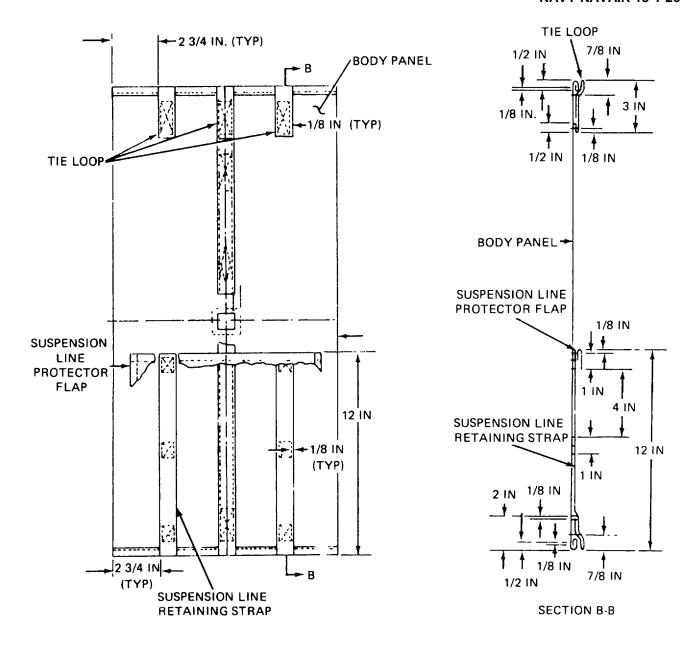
Deployment Bag Suspension Line Retaining Strap Fabrication Details.
